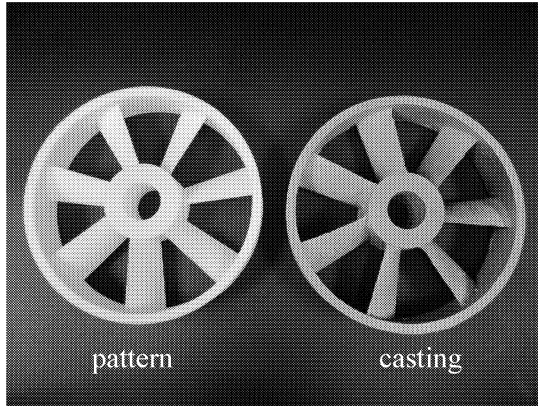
Turbine Wheel: ABS polymer, 3D extrusion printed, expendable pattern and investment casting.
